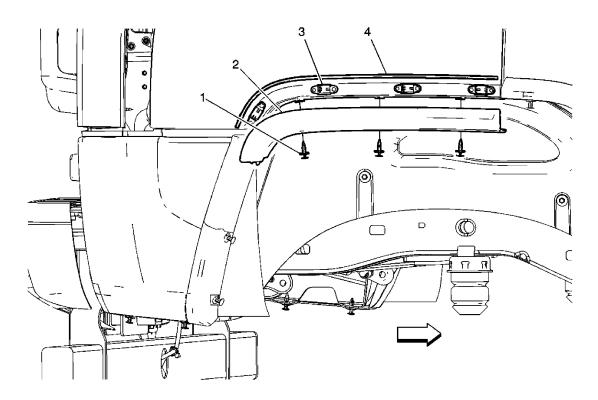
Identifying Rear Wheel Opening Flare (Rear Body w/BRM & RHD) Courtesy of GENERAL MOTORS CORP.
